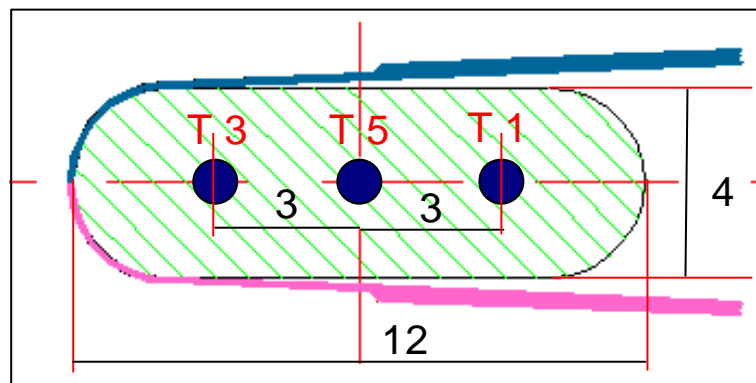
Ribbon shaped thermo couple aligned to the narrow side of an instrumented TMF-specimen (4mm x 12mm). Centre coaxial TC (T5) and eccentric coaxial TCs (T3, T1) in the gauge length cross section.
